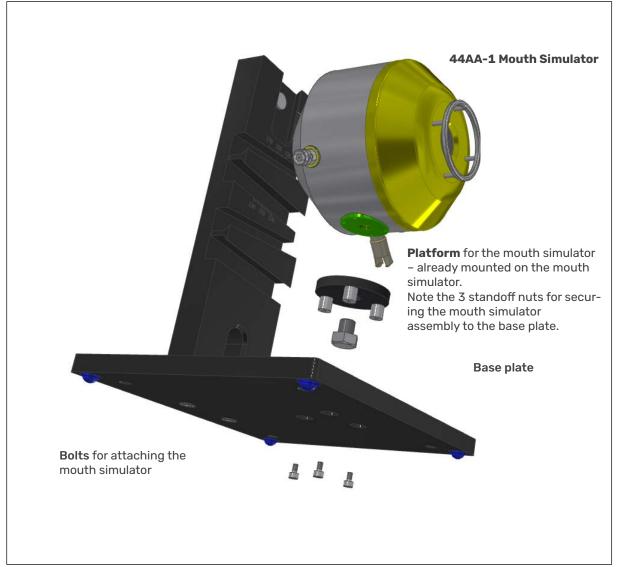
Mounting the mouth simulator using the included RA0320 Mounting Kit for 45CC.
